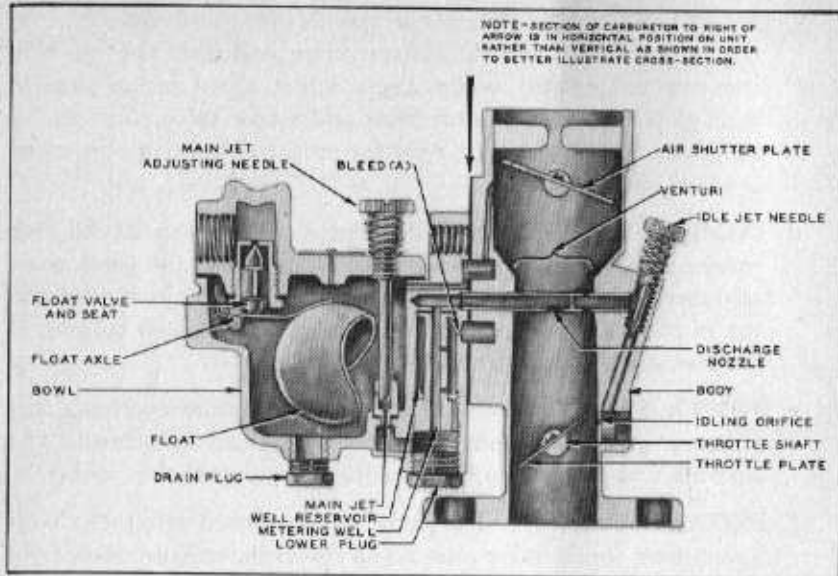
SECTIONAL VIEW OF CARBURETOR
